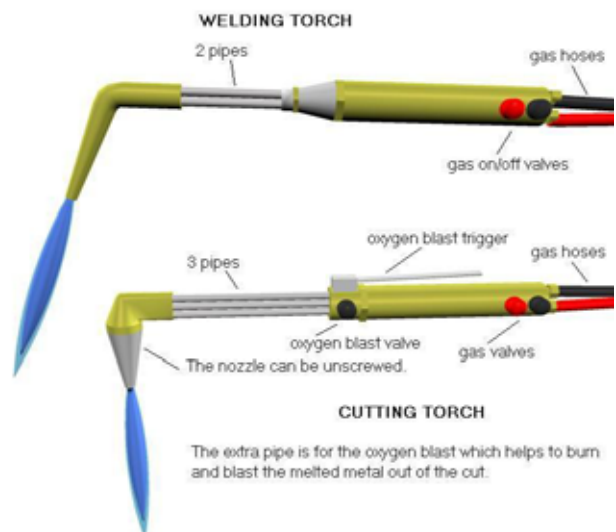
Difference between welding and cutting torch. [3]
